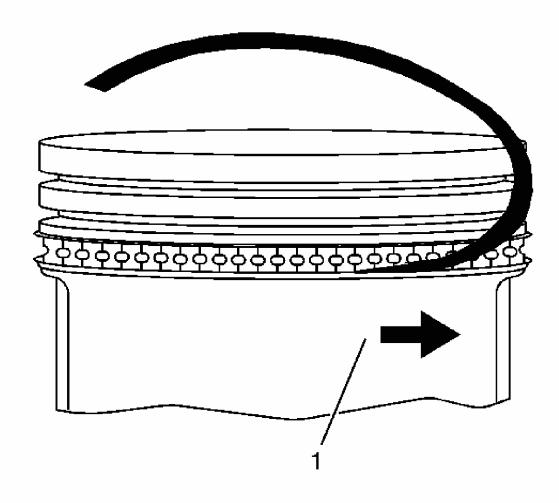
View Of Lower Oil Control Piston Ring Courtesy of GENERAL MOTORS CORP.
